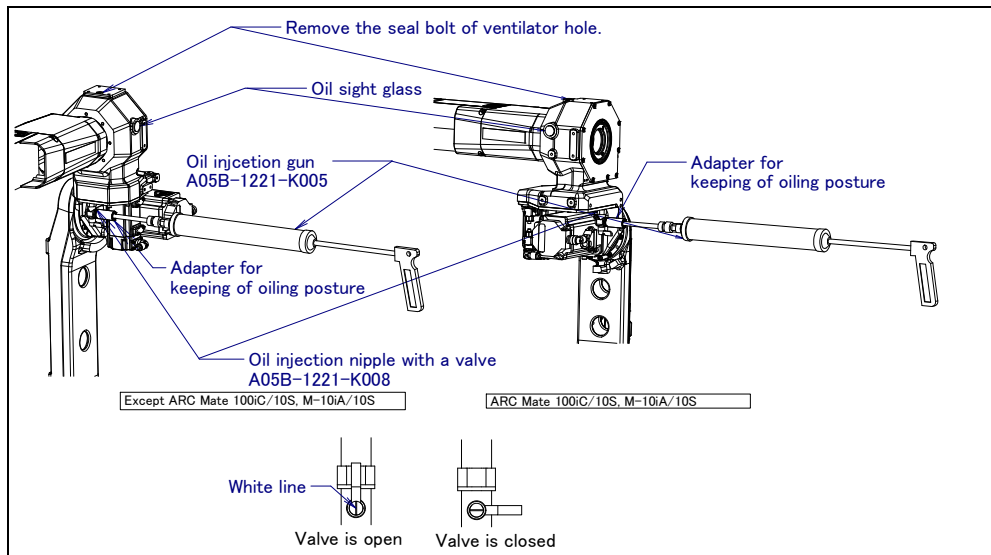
(e) Oiling by oil gun (supplying oil J4-axis gearbox)
